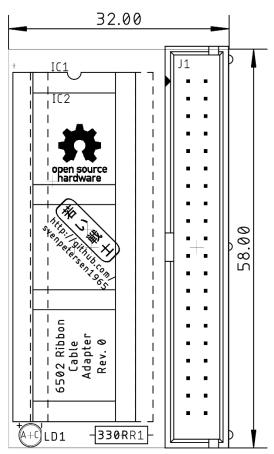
Dimensions of the 6502 Ribbon Cable Adapter#
